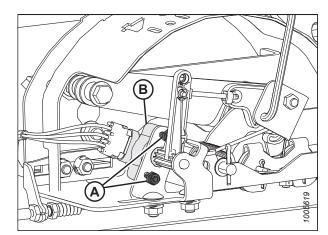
Most Common 5 Volt AHHC Sensor Assembly
